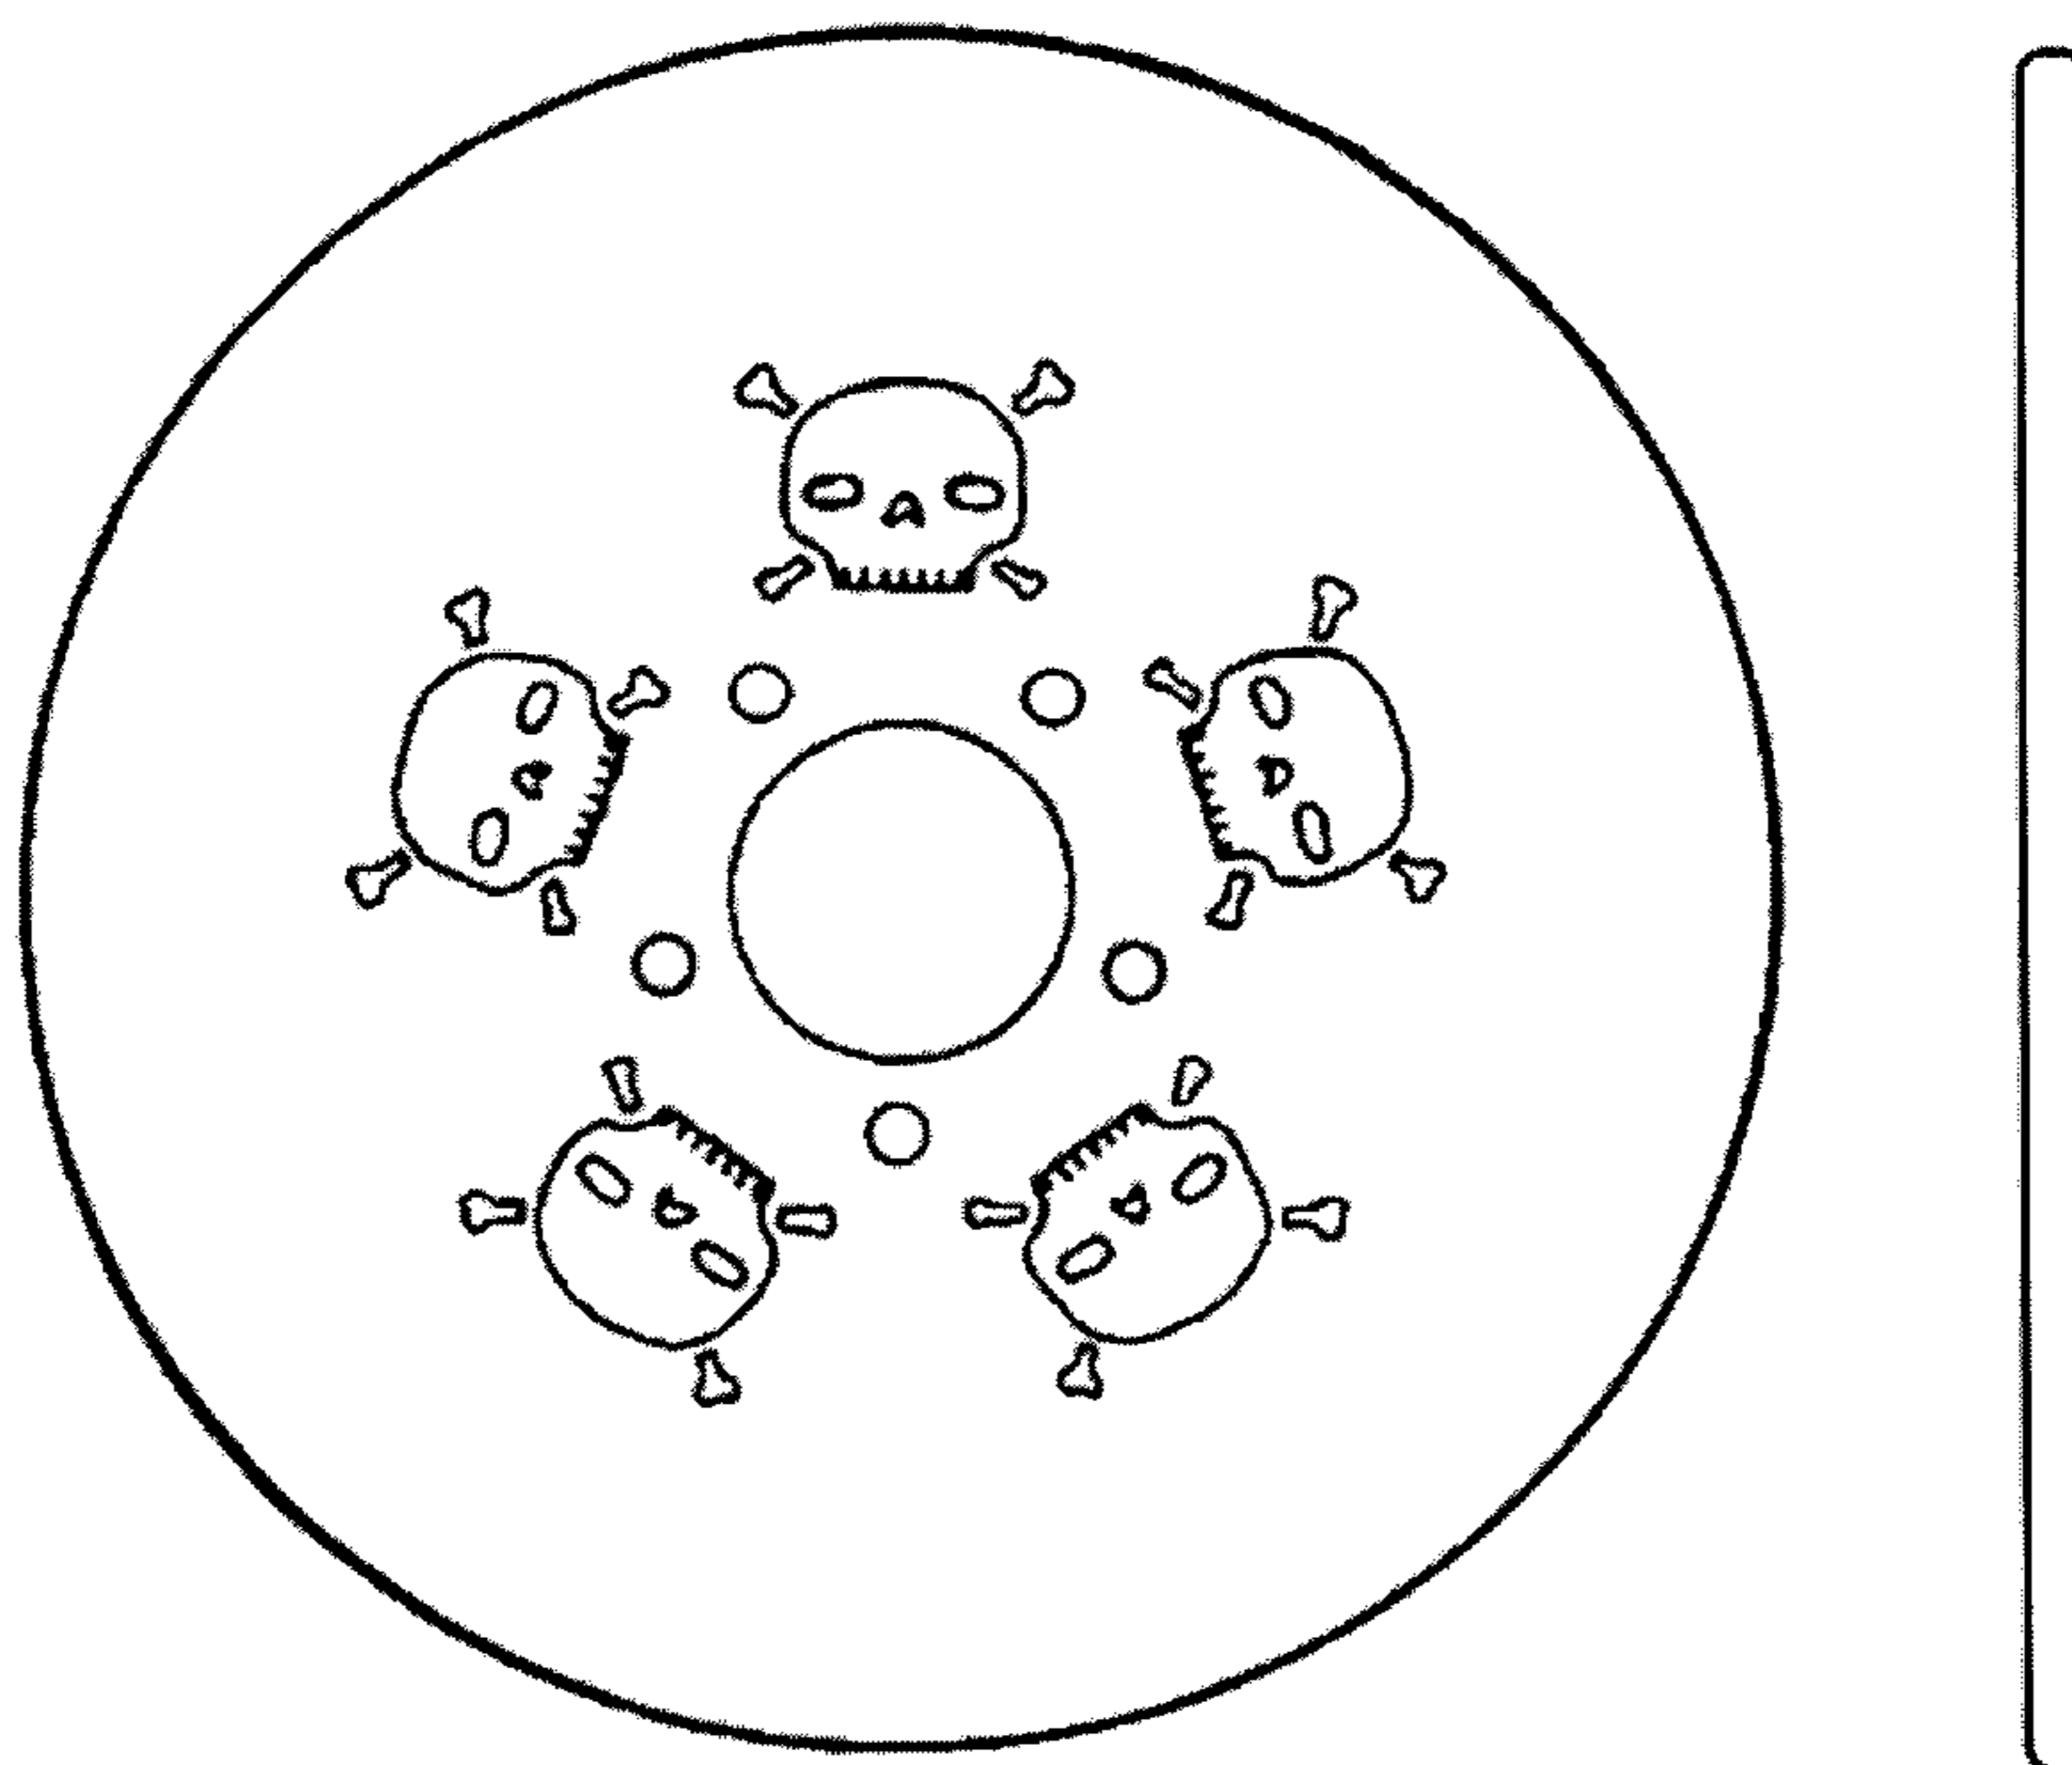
is a front view of a rotor for a motorcycle showing one embodiment of the design of the present invention, the back view being the same;
